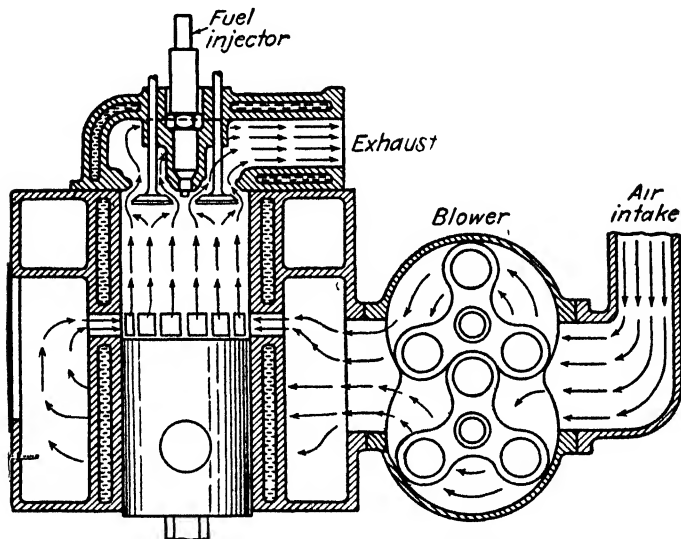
SCAVENGING PROCESS IN TWO-STROKE ENGINE.
